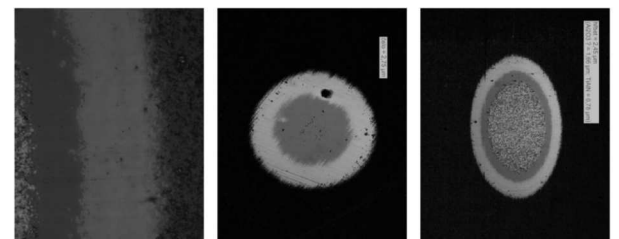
Pictures of calotte of HSN² coating at face and flank of reaming head MT3 [5], [6], [7], [8], [9]
